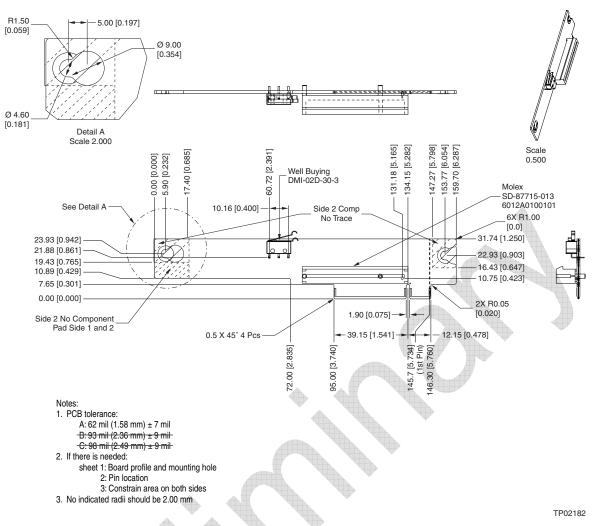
1U Low Profile PCI-X* Riser Card Mechanical Drawing
